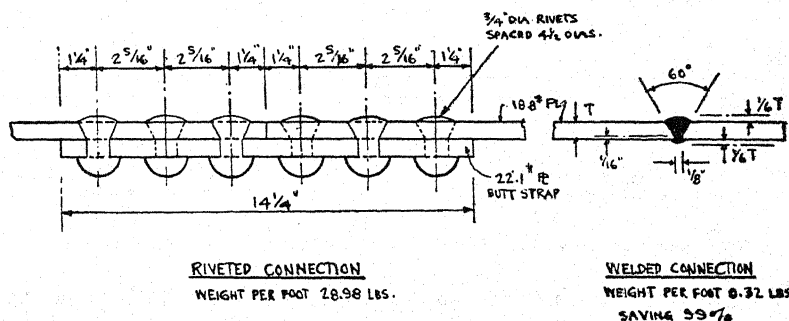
Comparative weight—riveted and welded shell plating butts.
